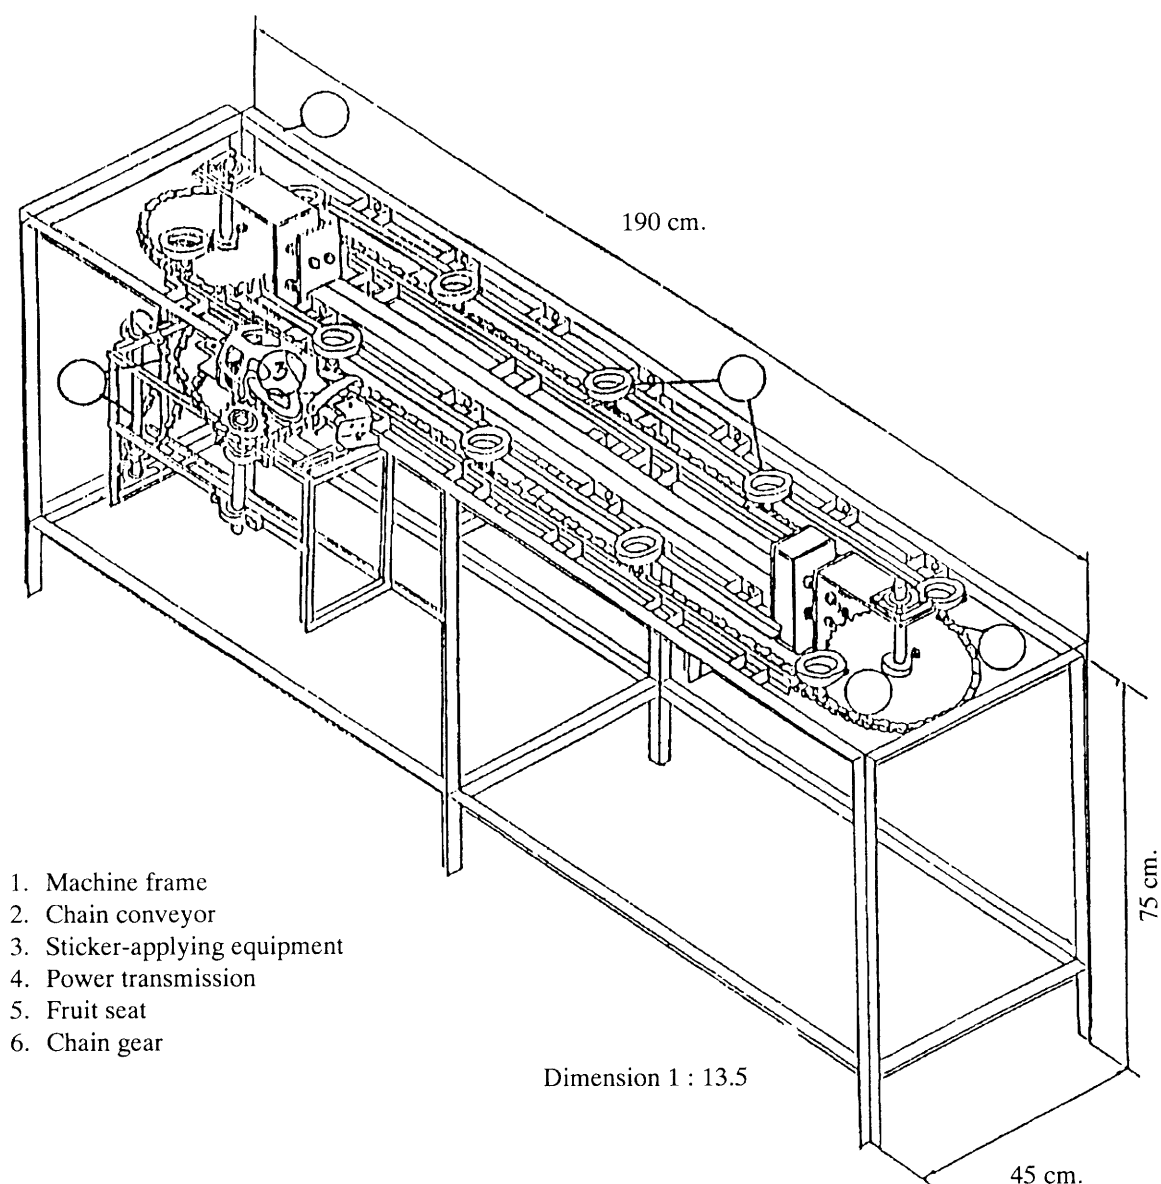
Three-dimension schematic diagram of the sticker-applying machine.
